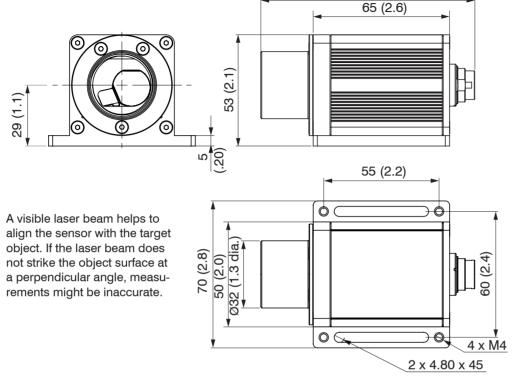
Dimensional drawing optoNCDT ILR2250-100, dimensions in mm
